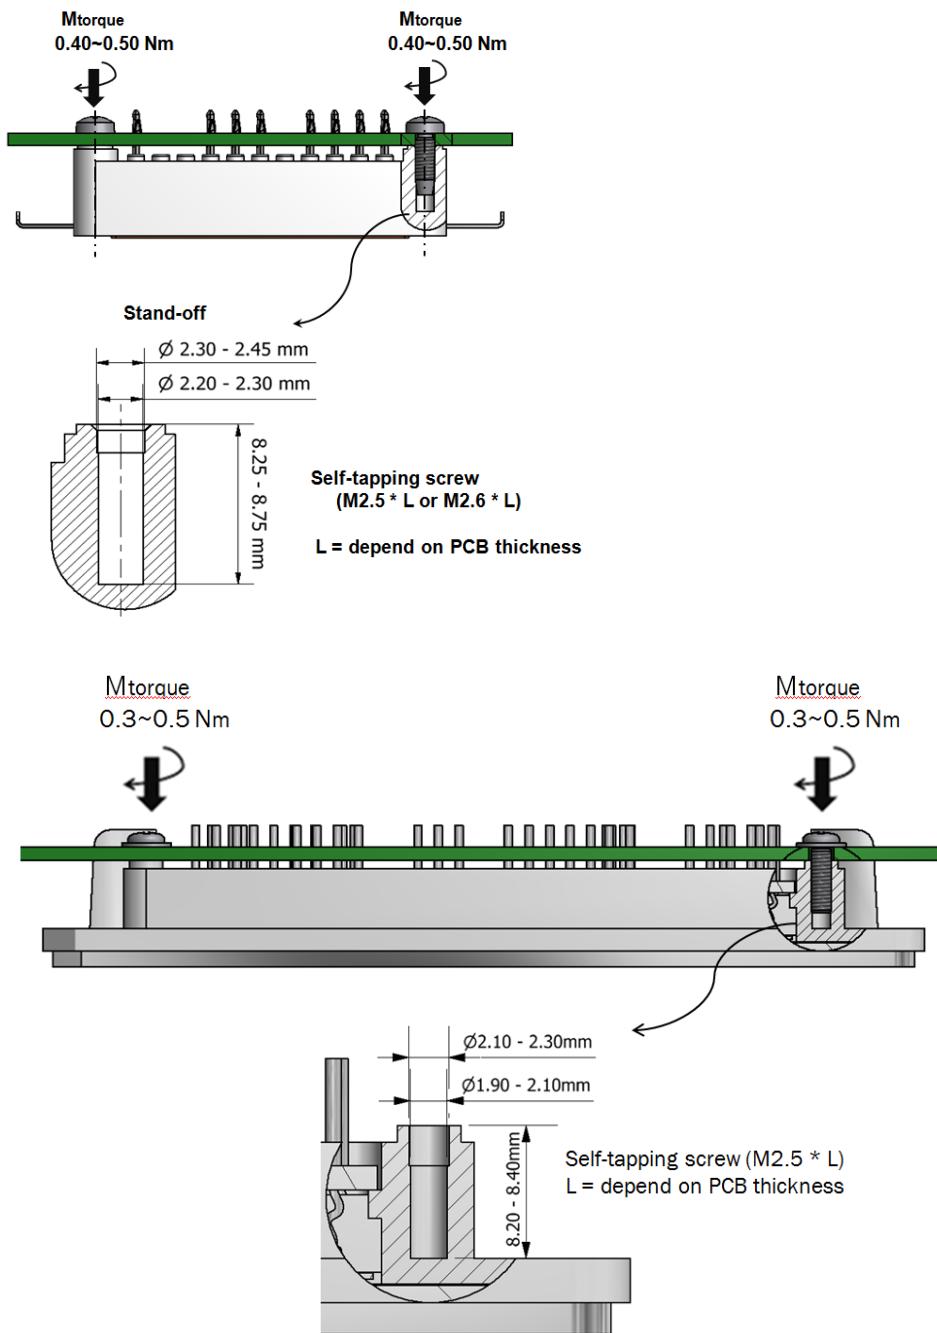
Q2 Screw Clamping on Stand-offs and Key Dimensions of Screw Hole
